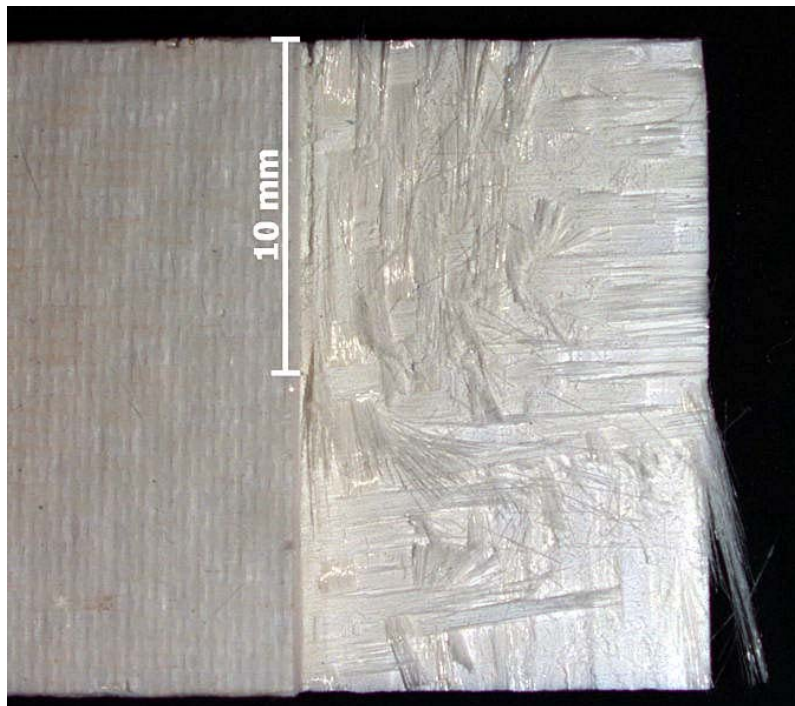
Fracture surface of N720/A specimen tested in tension to failure at 1200 °C in air, Piece B.
